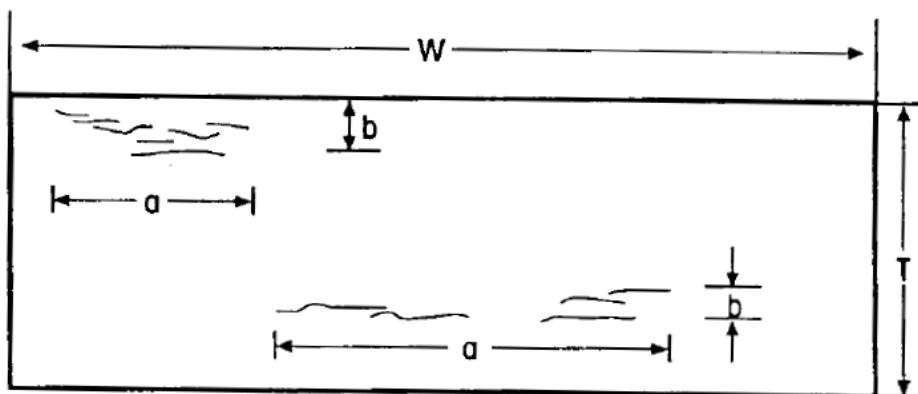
Illustration of crack dimensions used in evaluating test samples from NACE TM0284
